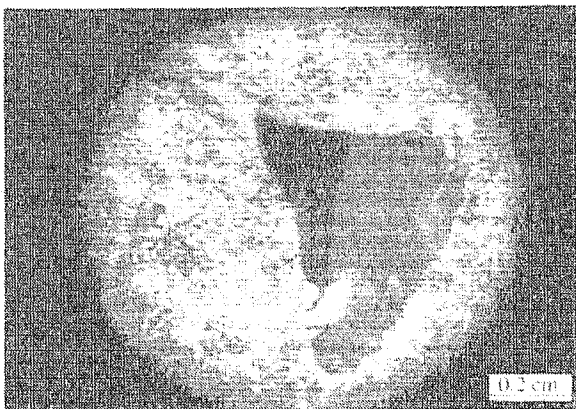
Sectioned view of the 2.5 cm thick bar.
